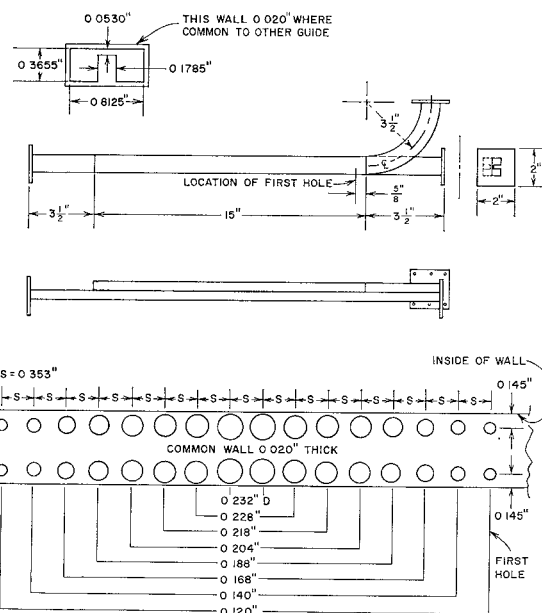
Pertinent dimensions—single-ridge broad-wall coupler.
